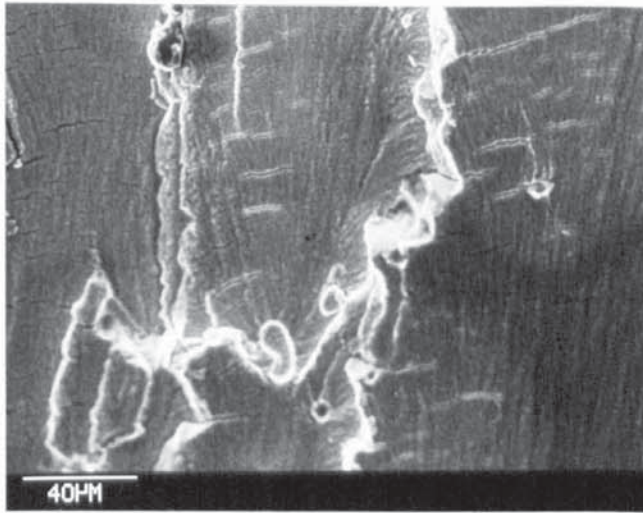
Fracture surfaces for (001)-(100) fatigue crack propagation specimens tested at 1.25Hz
